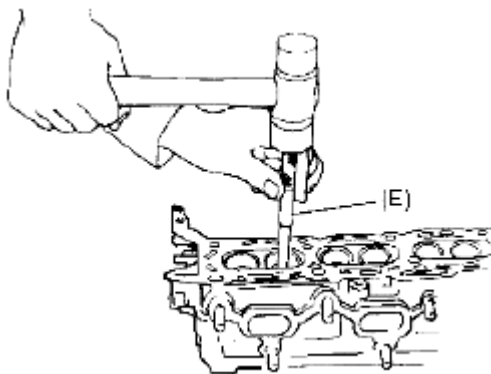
Removing Valve Stem Seal From Valve Guide
